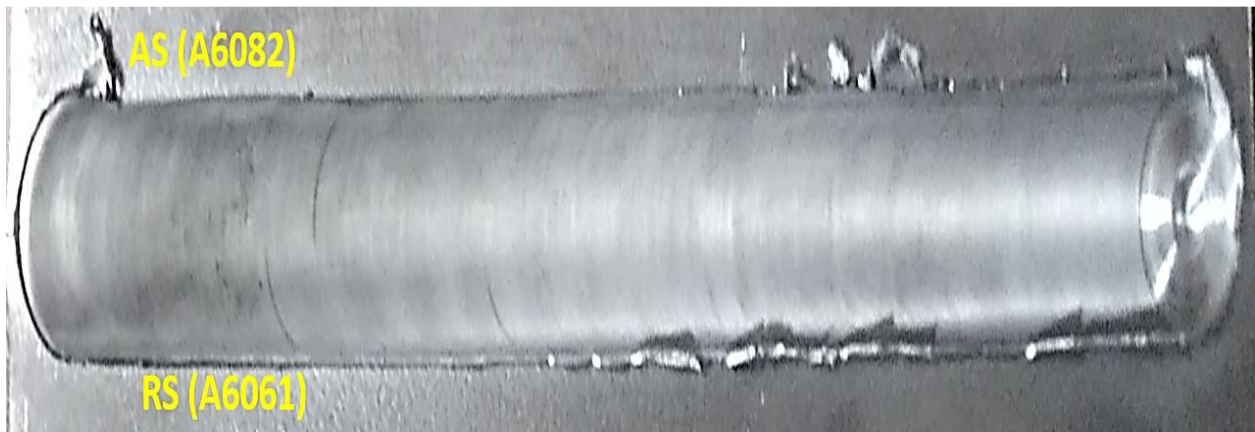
Surface appearances of the FSWed A6061-T6 and A6082-T6 joint
